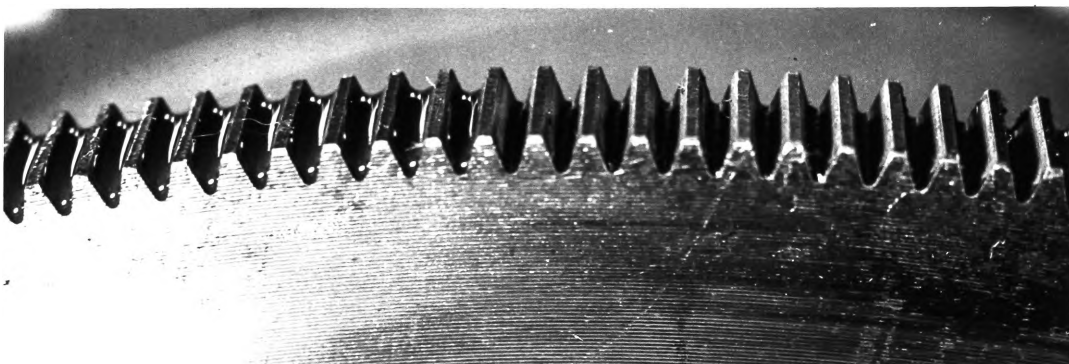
TEETH OF GEAR SET 1 WHEEL - 9226 HOURS
